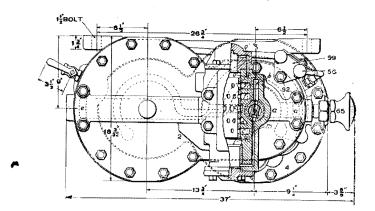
HORIZONTAL SECTION OF REVERSING VALVE CHAMBER.
